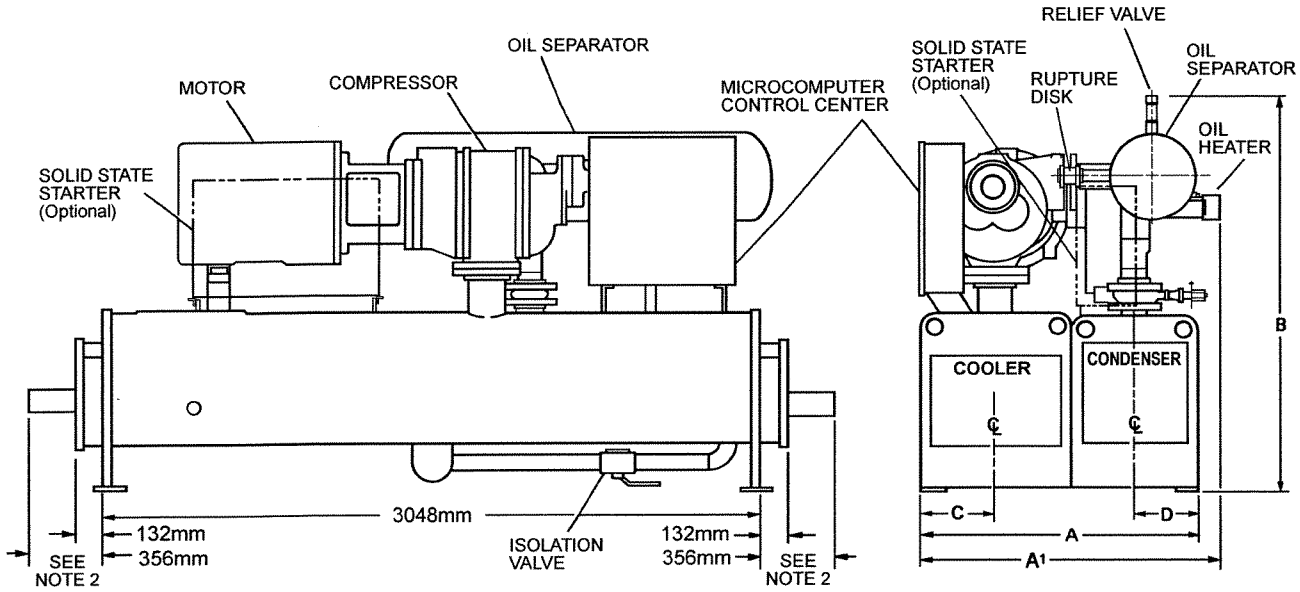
OVERALL DIMENSIONS - ENGLISH, S0 THRU S3 COMPRESSOR
